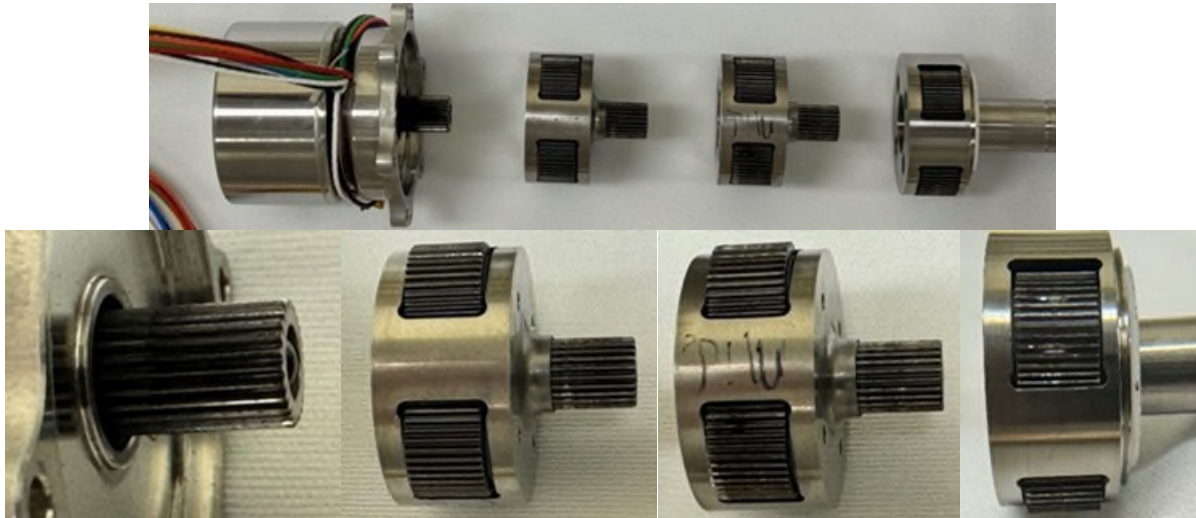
Post-test inspection images of COLDArm life test unit. 1st, 2nd, and 3rd stages are shown left to right. Gear tooth fracture is observable in the 2nd and 3rd stages.
